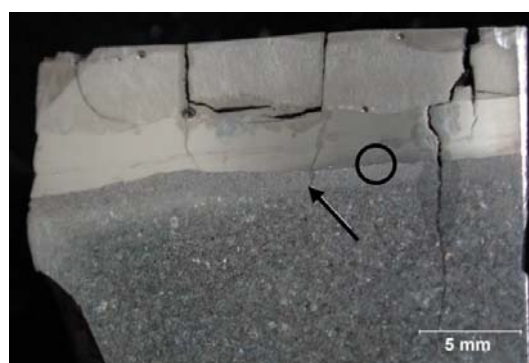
[7]. Intersection of the sample presented in Figure 2 – deep cracks in the padding weld penetrating to the base material are visible. The lack of weld penetration is also noticeable. Etch. 5%  $HNO_3$
